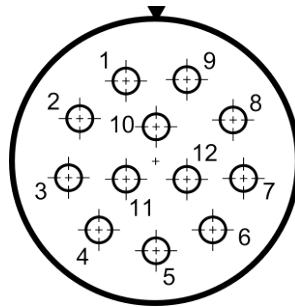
View on solder cup side of socket (rear view of female counterpart to be connected to sensor)
